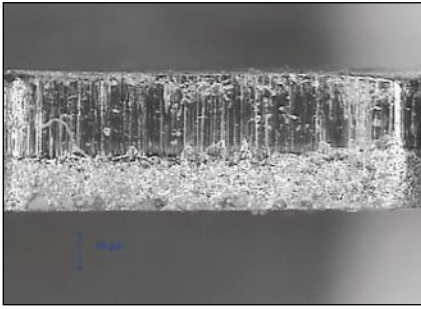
Magnified view of the edge of the blank. This clearly shows the cut/break ratio
